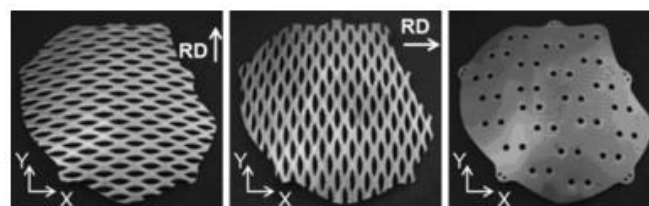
Cranial implants produced from expanded metal sheets and from solid metal sheets (the holes were drilled after forming) (Göttmann et al., 2013).
